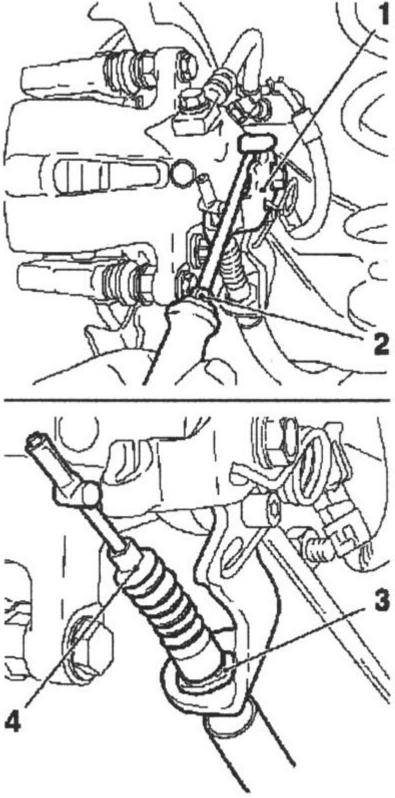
Withdrawal Braking shoes (Preliminary operations):
